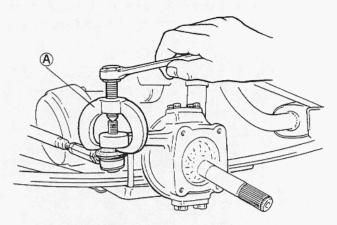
Special tool (Tie Rod End Remover 09913-65210)
